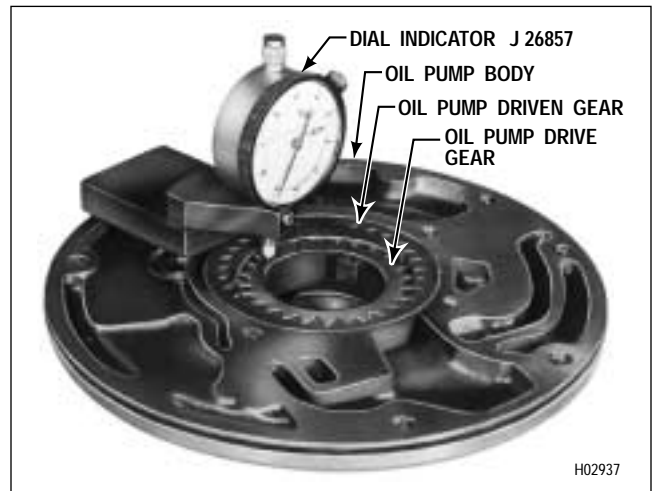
Dial Indicator Check of Oil Pump Drive Gear End Clearance
